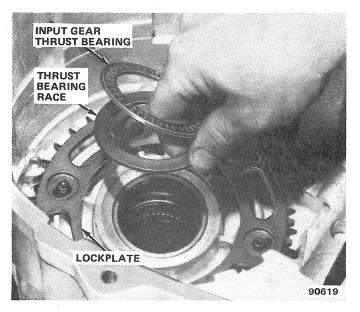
D-24 Input Gear Thrust Bearing and Race Removal—Installation
